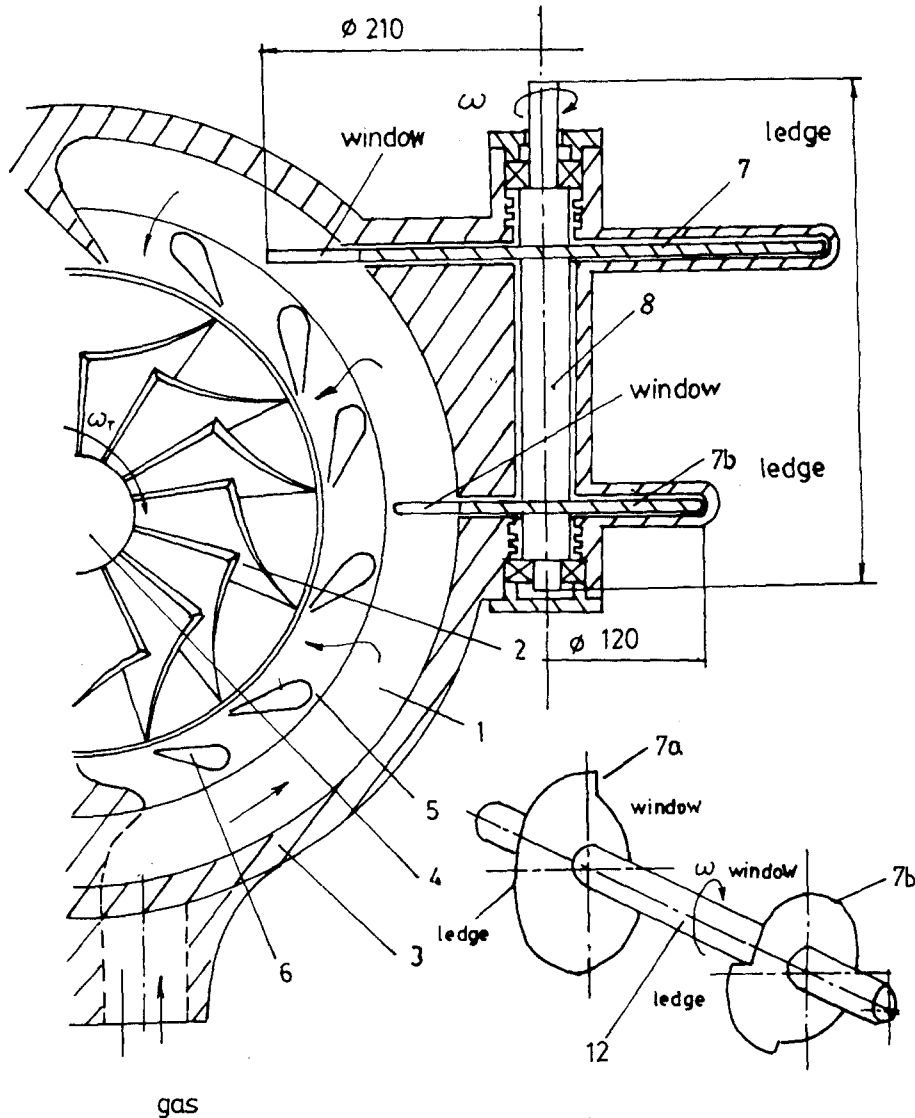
Systems of turbocharging with turbo blades 1 - gas passage channel ; 2 - wheel blade ; 3 - turbine case ; 4 - turbine shaft ; 5 - nozzle assembly ; 6 - blade ; 7 - disks ; 8 - shaft
